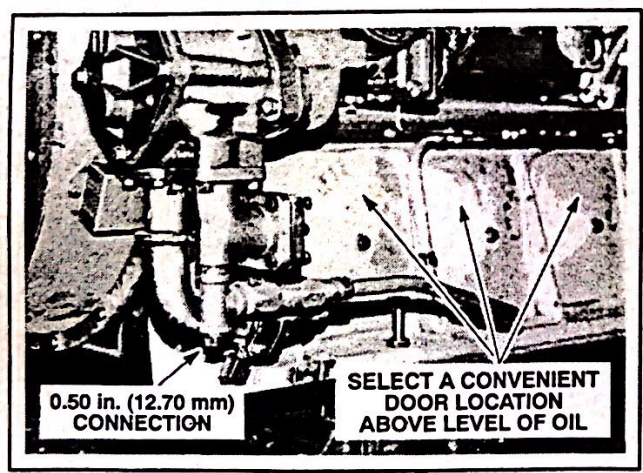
VHP 9390 P/N 489189 Connection Locations - Right Side View
